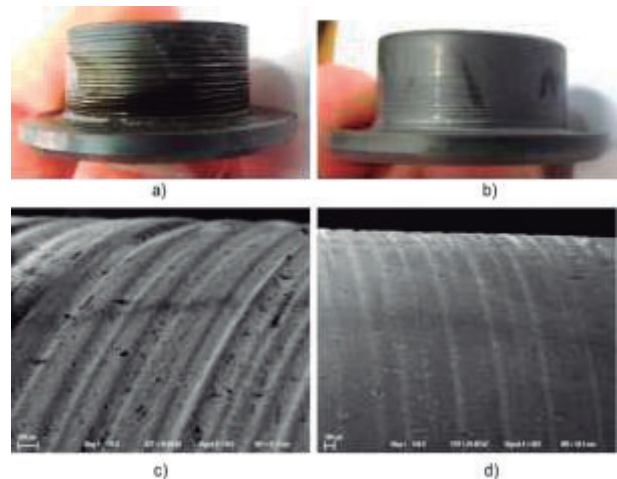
Inlet bearing sleeves at the end of the tests: a) Pump A bearing 1 sleeve; b) Bearing sleeve 1 of Pump B; c) Pump A sleeve surface, 100x magnification (SEM); d) Pump B sleeve surface, 100x magnification (SEM).
